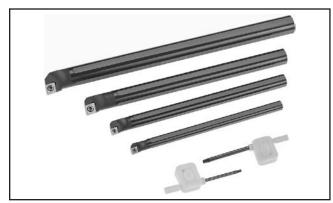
T10439 Carbide Insert CCMT Boring Bar Set.
